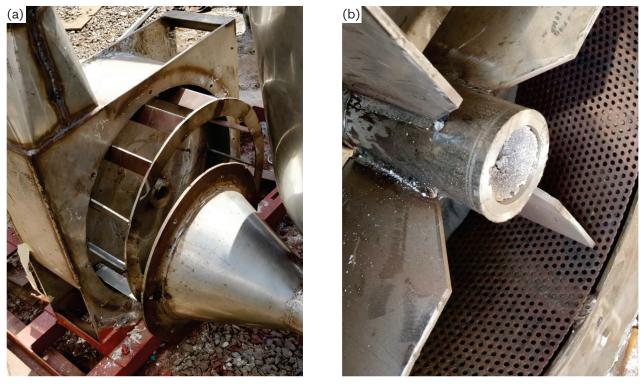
Centrifugal fan with straight-blade impeller (a) integrated with a cage mill (b) to assure product dispersion.
